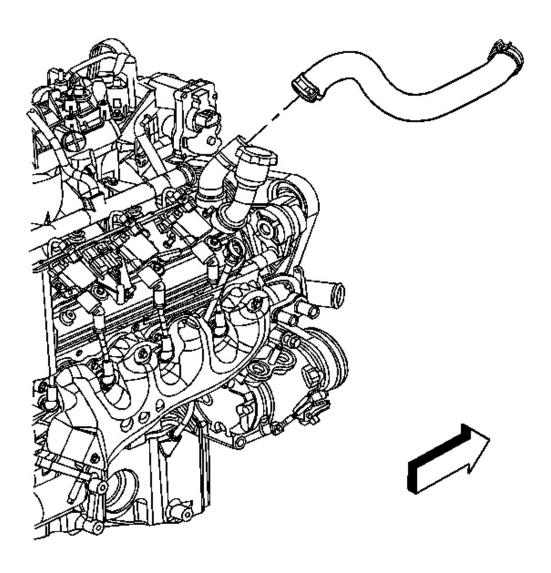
View Of Inlet Hose Courtesy of GENERAL MOTORS CORP.
